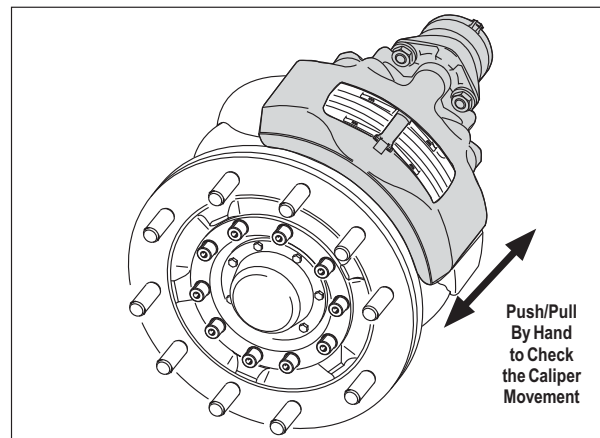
CALIPER RUNNING CLEARANCE (FIGURE DOES NOT SHOW WHEEL)
